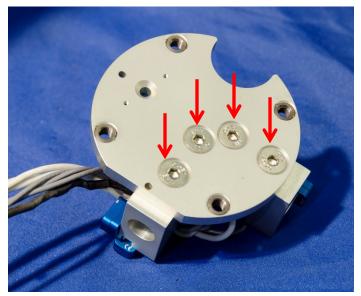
Secure the 7 accelerometer array fixture to the head accelerometer mounting plate
